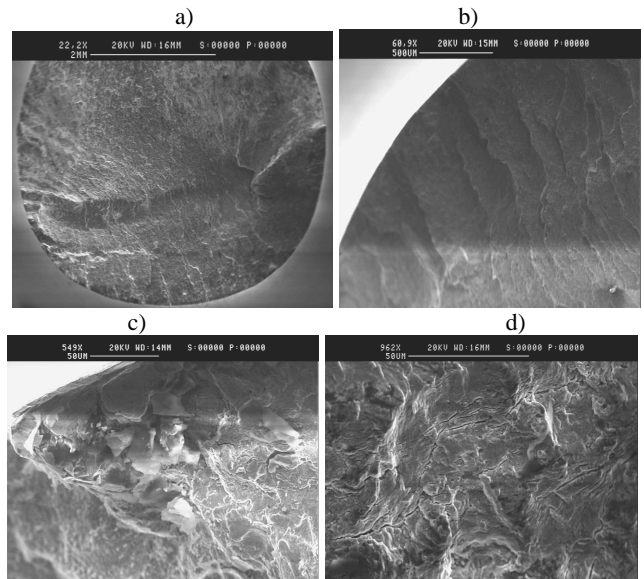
Torsional fatigue fracture surface of D38MSV5S specimen ($\tau_{max}=240$ Mpa, $R=-1$, $N_f=6.9 \times 10^8$), a) overview, b) fatigue shear step, c) secondary cracks and d) fatigue initiation
